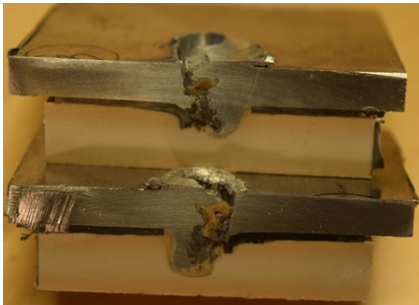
Problem in Weld Before Weld depth to Probe Length Optimization
